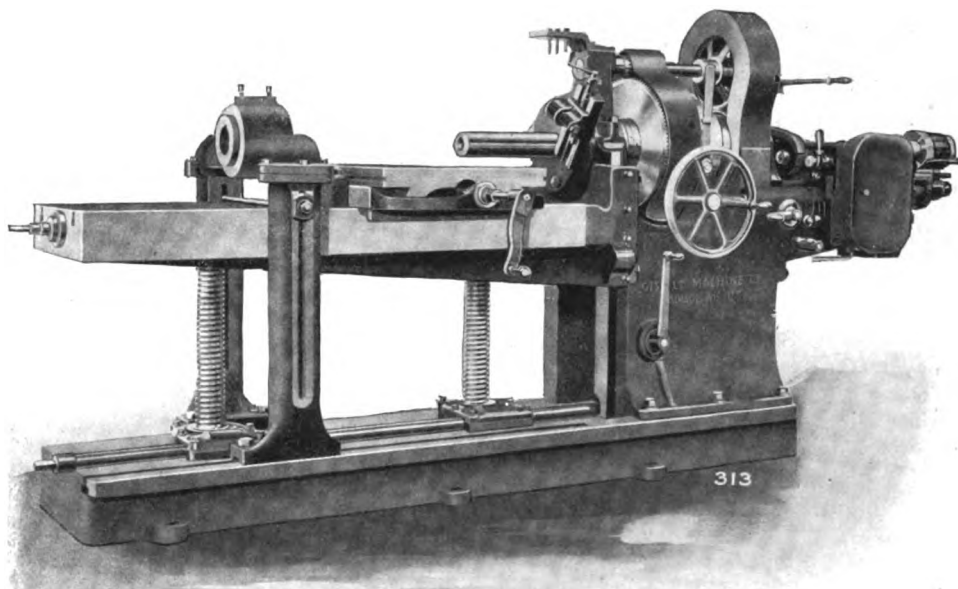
Gisholt 60-Inch (1500 mm.) Horizontal Boring Mill
